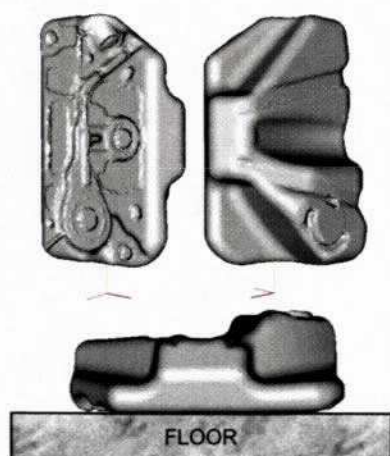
Blow moulded fuel tank. Position while out of mould cooling.
